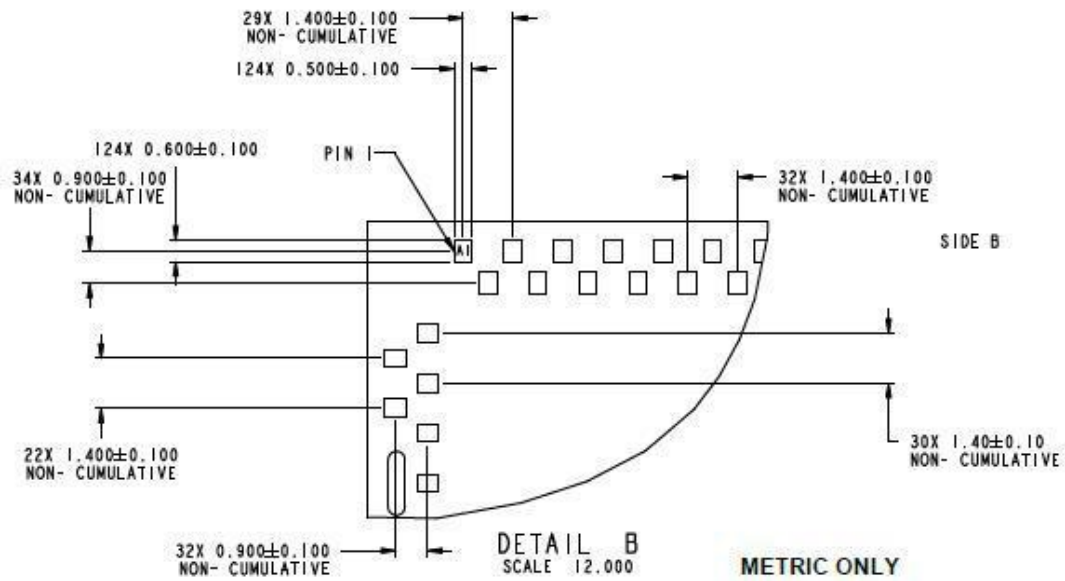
WL501 module pinout dimensions-Detail B (in mm)
